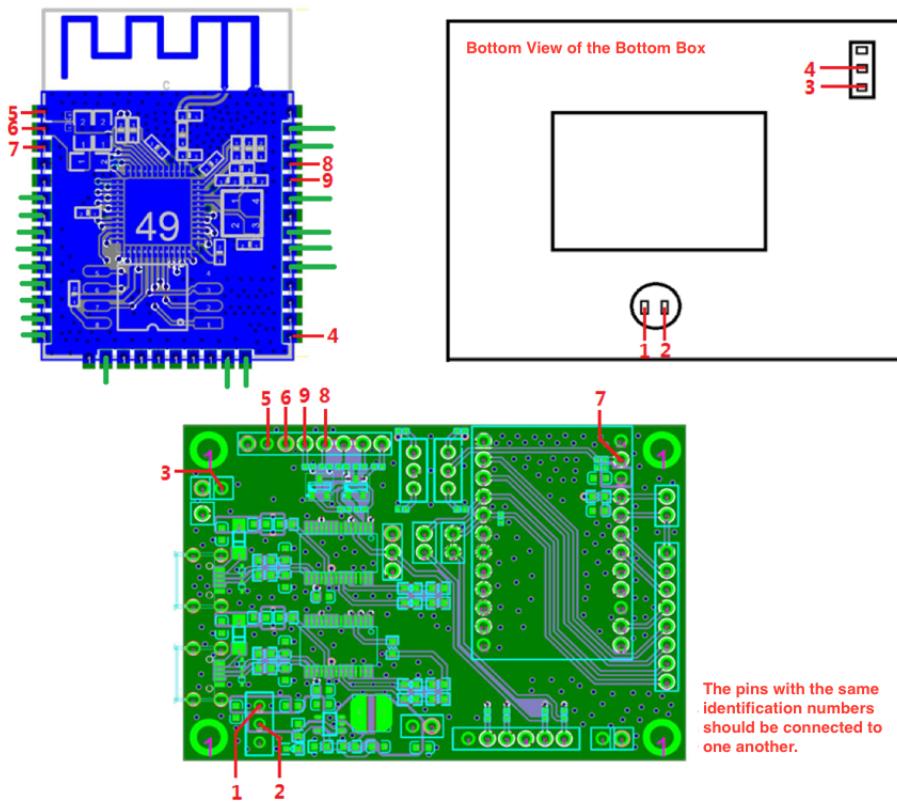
The Wiring of the ESP32-WROOM-32 Fixture
